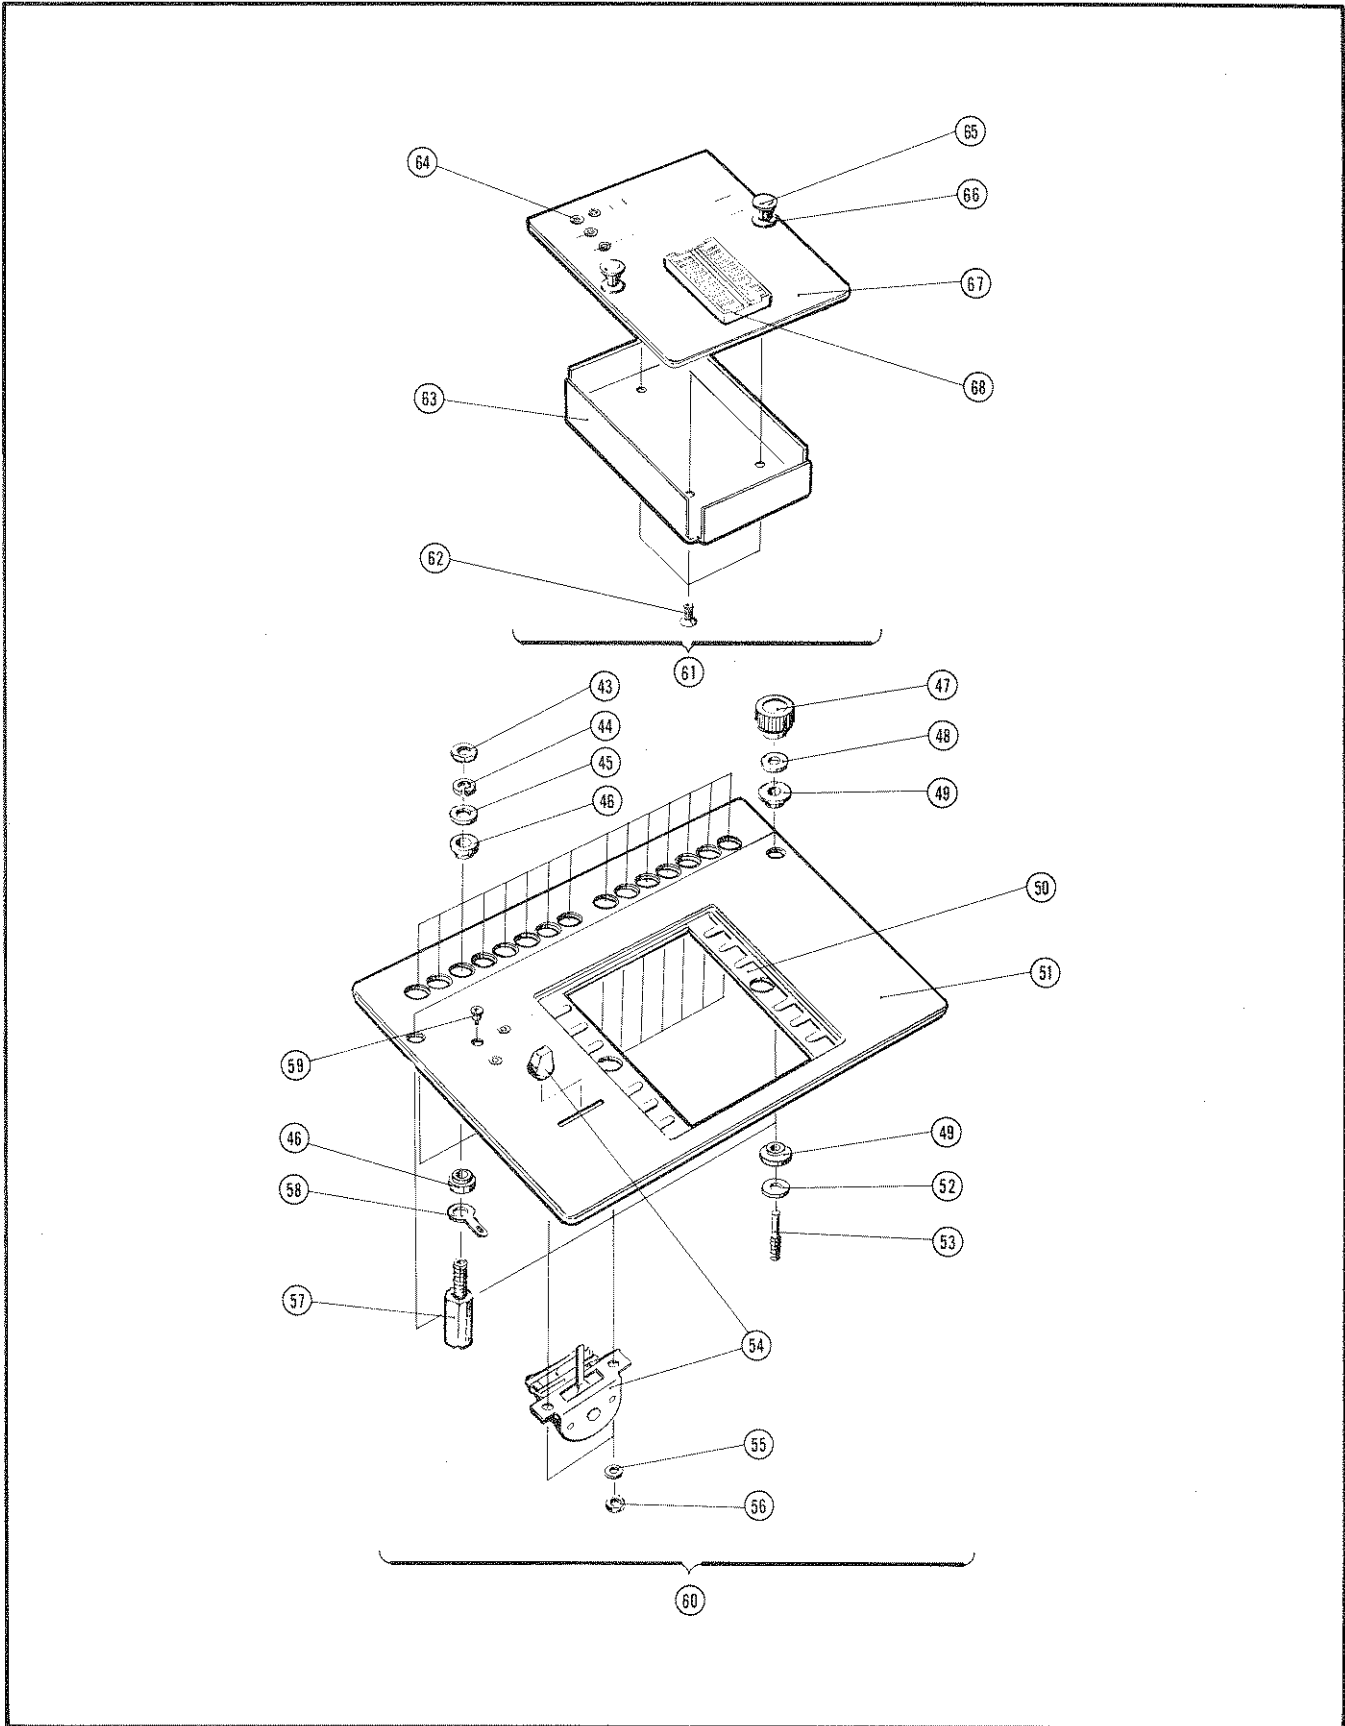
16058A Exploded View (Sheet 2 of 2).
